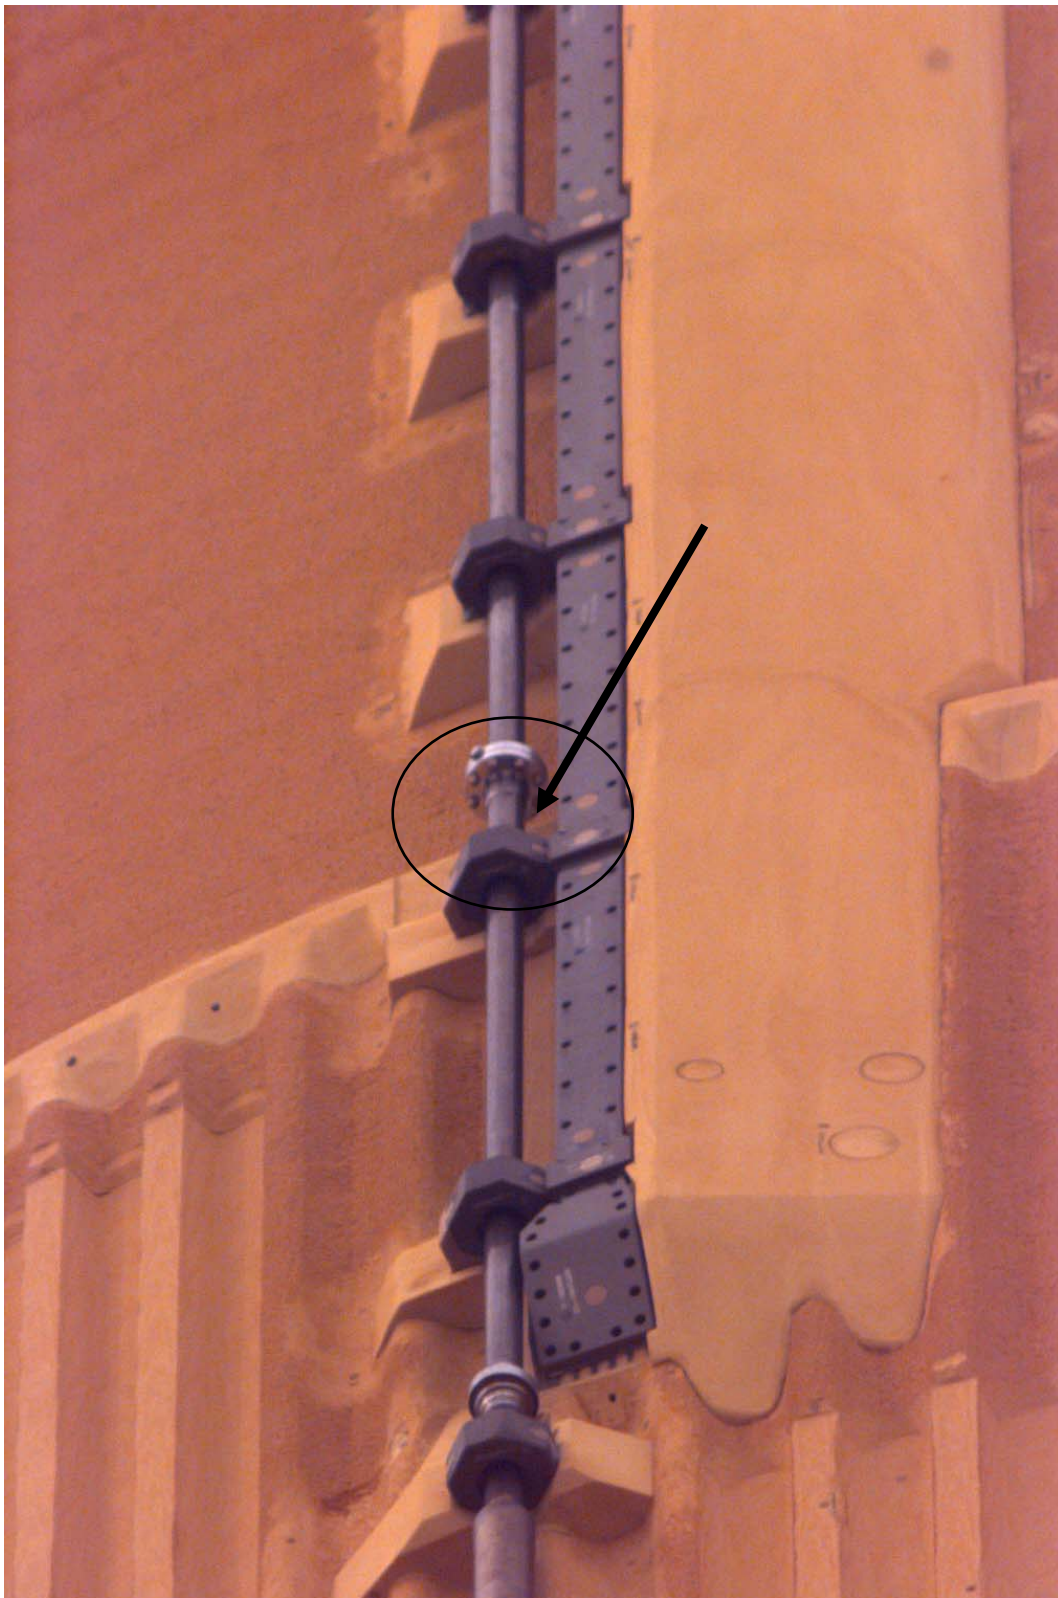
Area of damaged ET TPS under GO2 Pressurization line
